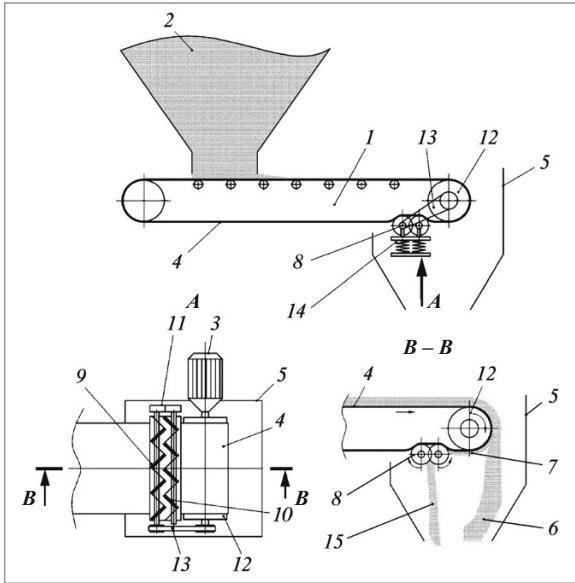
Belt feeder with a twin-screw cleaning setup.
